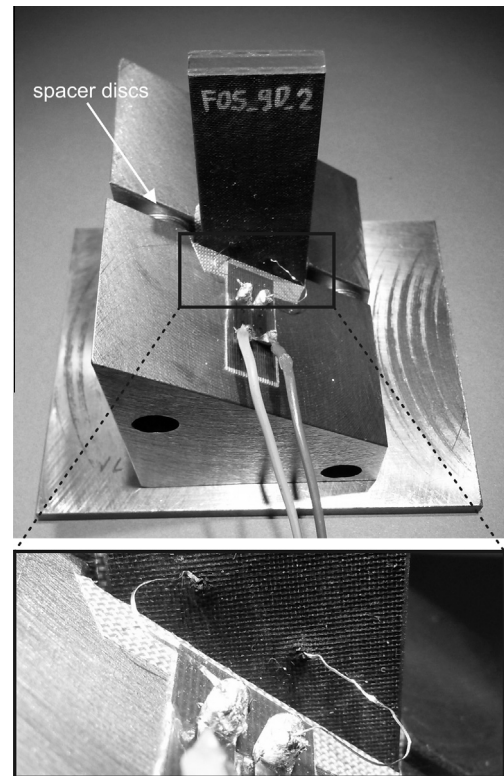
Photograph of the fixture with one-sided mounted specimen. The thickness adjustment via spacer discs and a zoom of the strain gauge solder contacts are visible.
